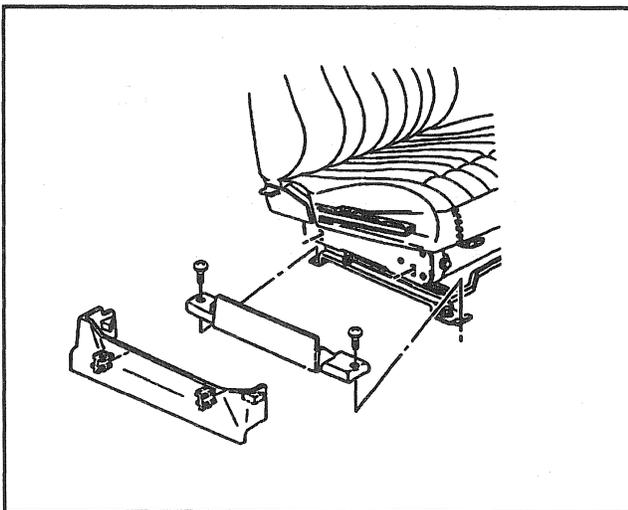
Front Bucket Seat Trim Cover (Right Side Only)
